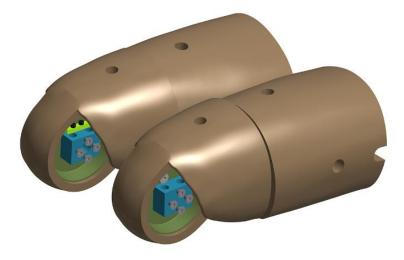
Knees assembled to allow inboard rotation stop placement
